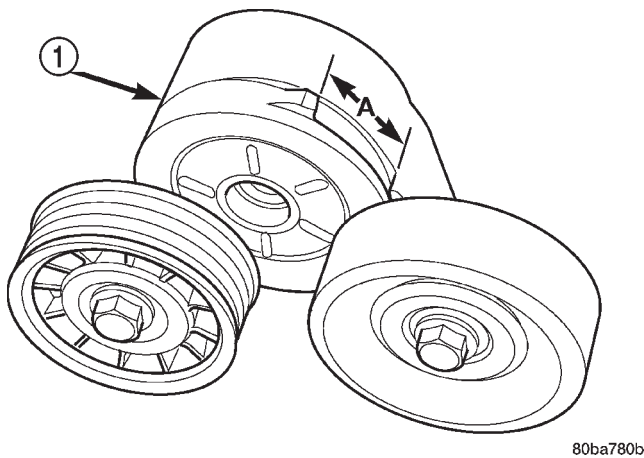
Automatic Belt Tensioner—4.7L Engine
